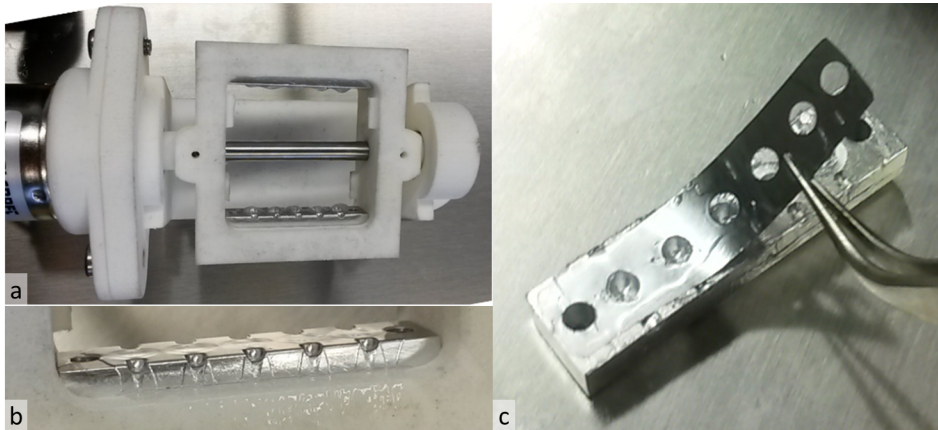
a) the outer part (bottom) and the sealing part (top) were placed in the centrifuge prior to degassing. b) smooth surface of the fresh silicone mixture in the outer part right after the degassing in the centrifuge. c) removing the sheet part from the outer part after degassing the fluid filling in the vulcanized lateral surface.
